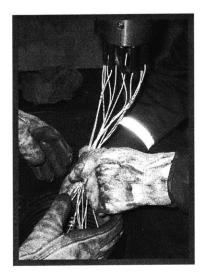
A spark-tester. The wire connection is passed through the metal beads of the spark-tester which detects any holes or particularly thin sections of insulation.
